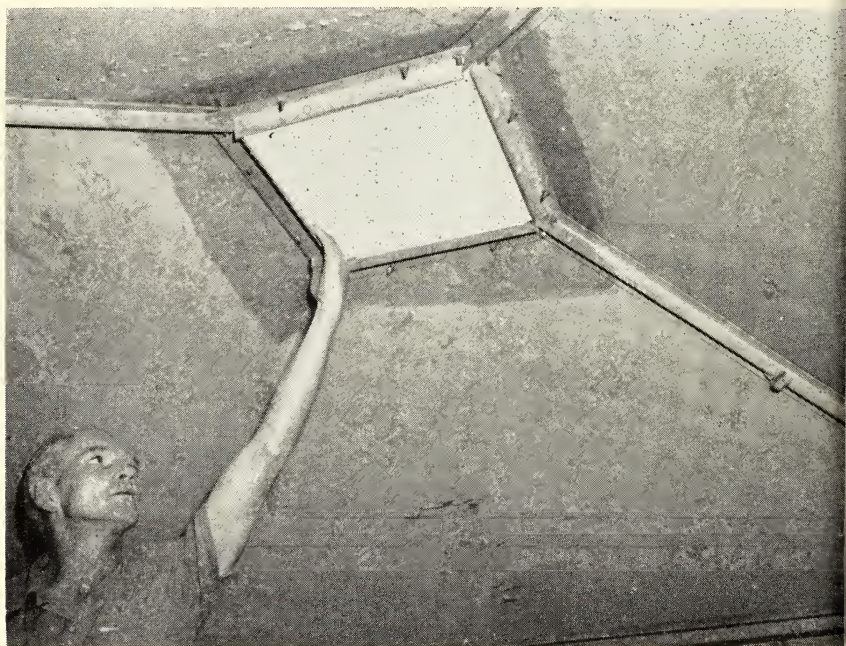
Cab roof reinforced by bolting 1-inch angle iron to edges of 18-inch hole.
